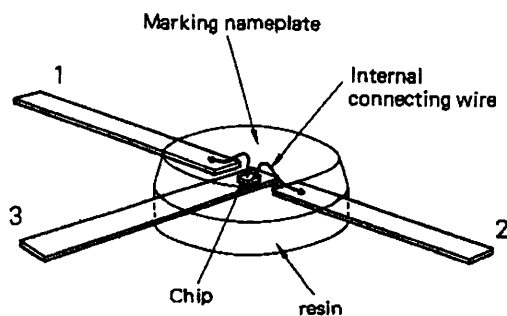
Interior Construction of 3-Lead DISKMOLD Transistor
